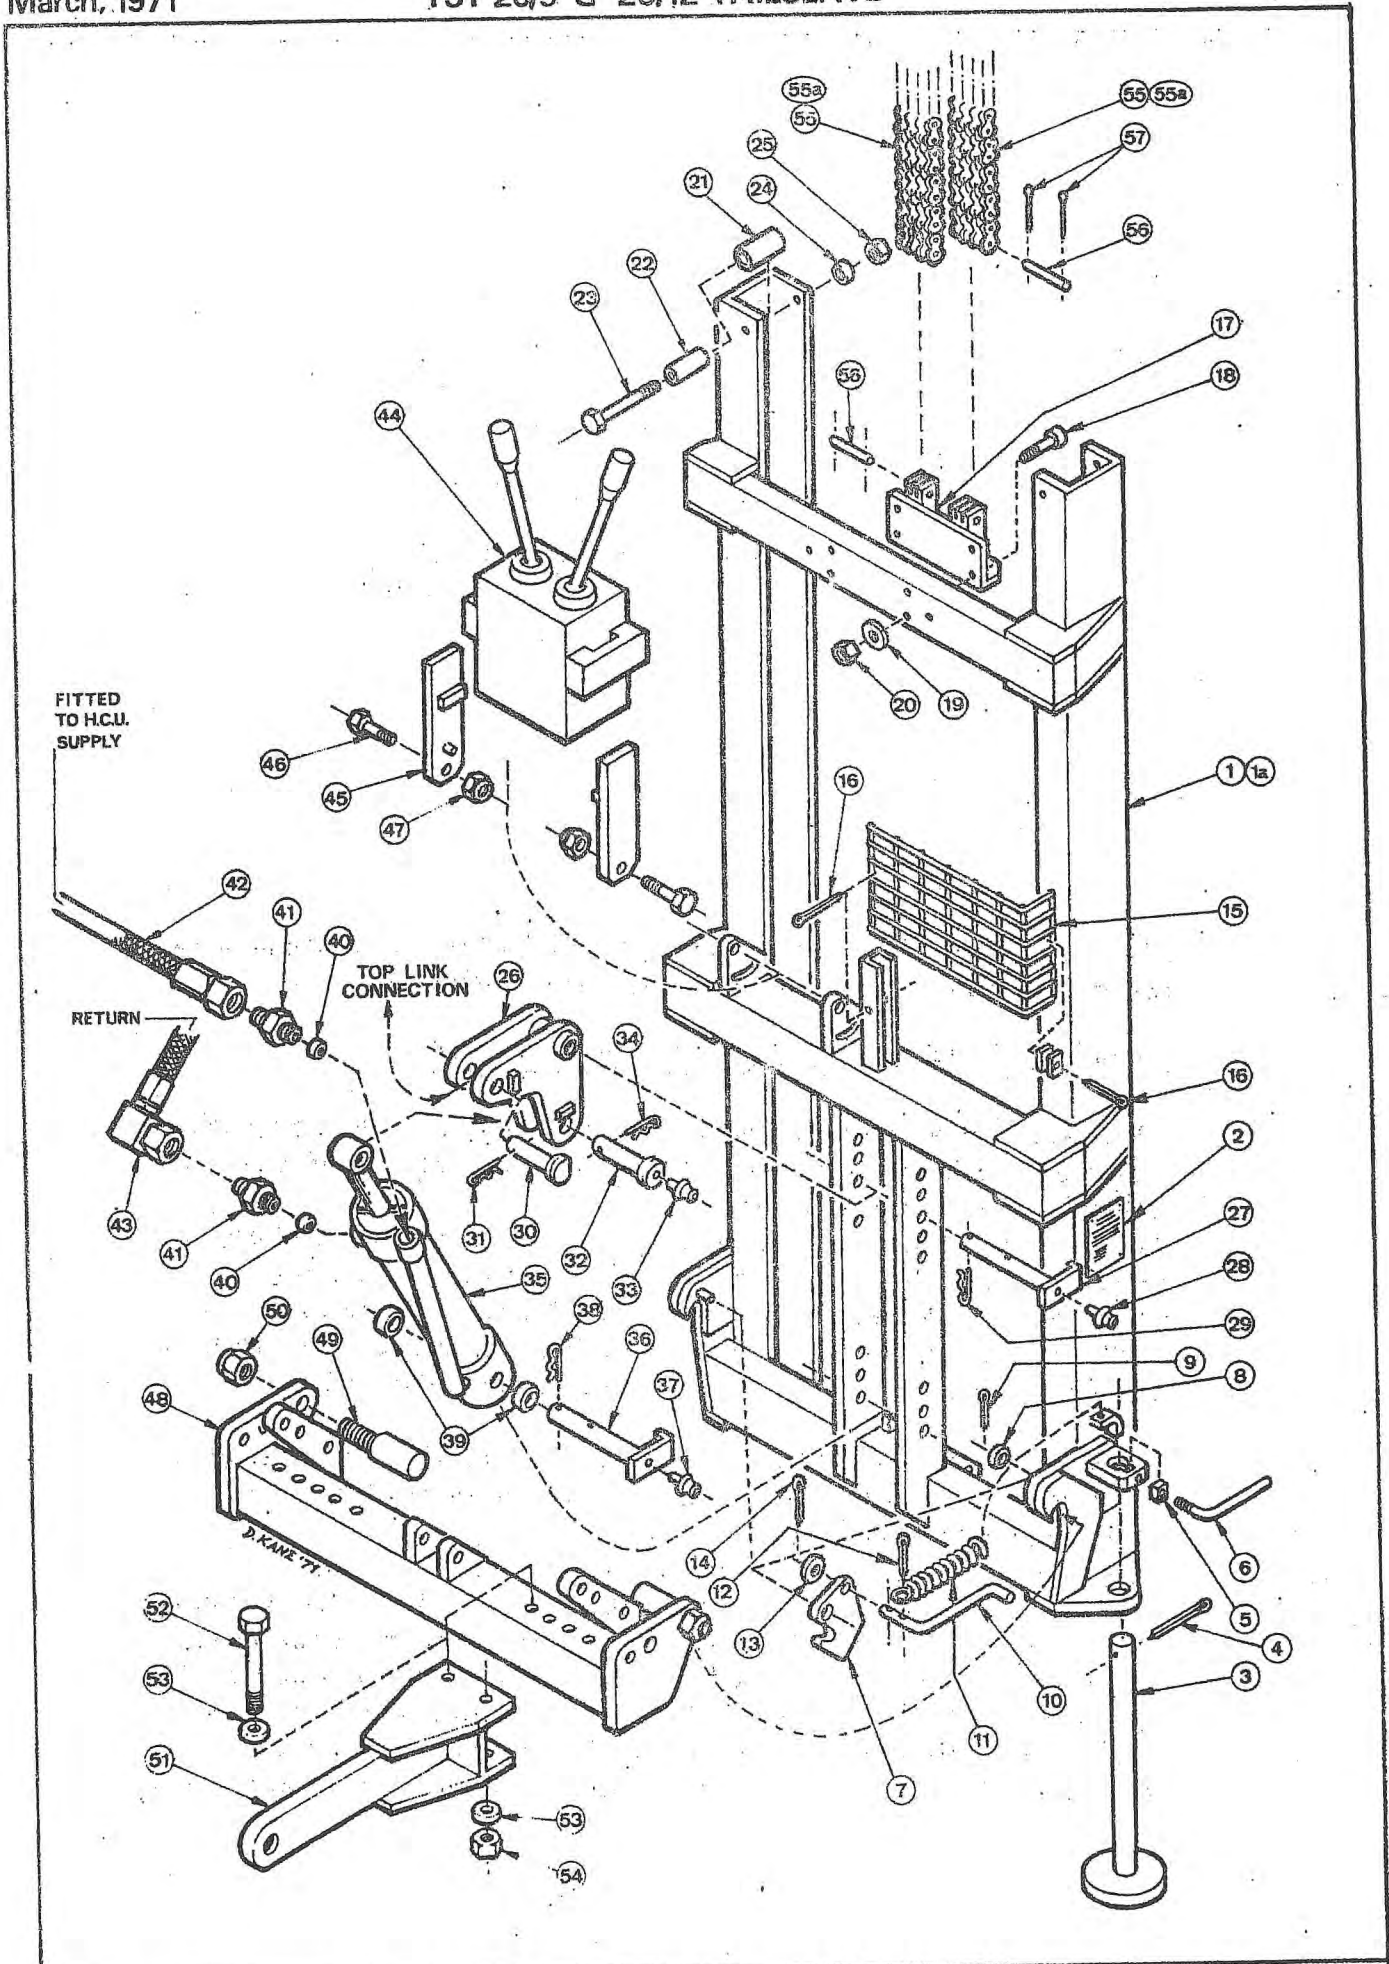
PARTS BREAKDOWN, OUTER MAST ASSEMBLY
